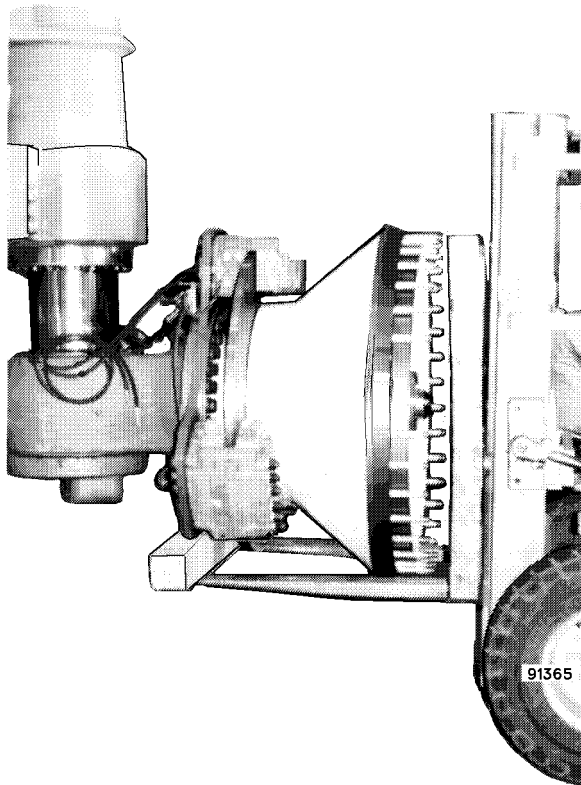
SPINDLE AND WHEEL HUB REMOVAL
